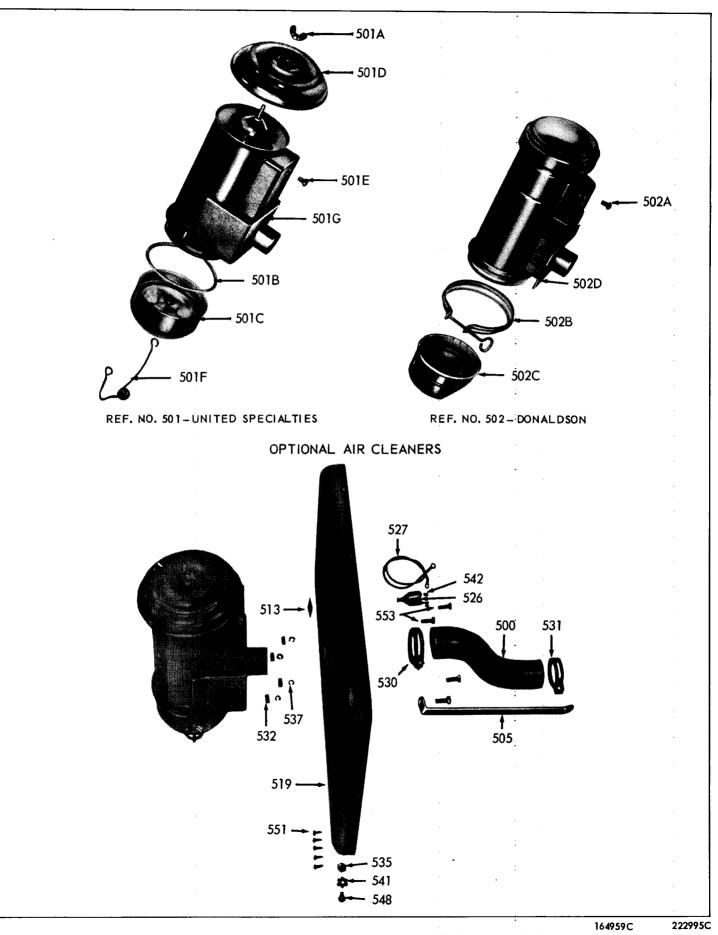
, END PANEL AND AIR CLEANER FOR ENGINE HOUSE WITH UNDERSLUNG FUEL TANK
